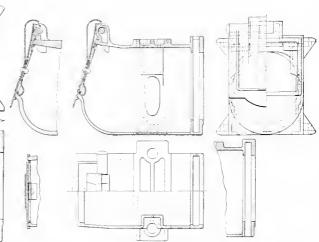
Gould Passenger Journal Box with Inset Lid and Dust Guard.
